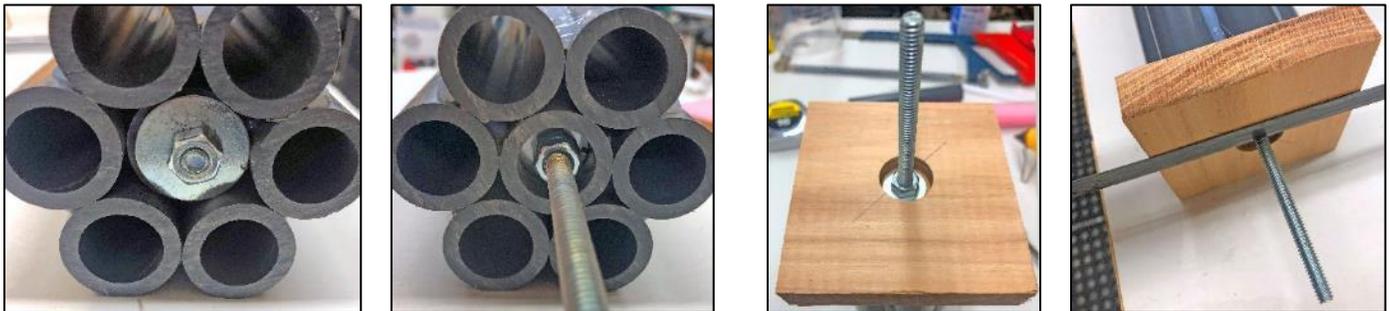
The Clamping Rod installed with the Mold Base and the excess being cut off of the threaded rod with a hacksaw.
